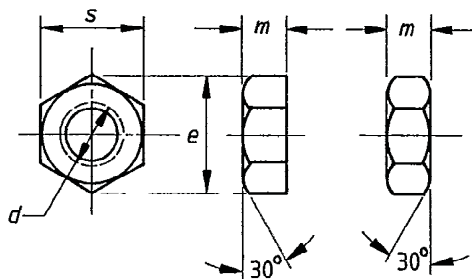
Machine screw nuts: precision type, sizes No. 0 to No. 12
